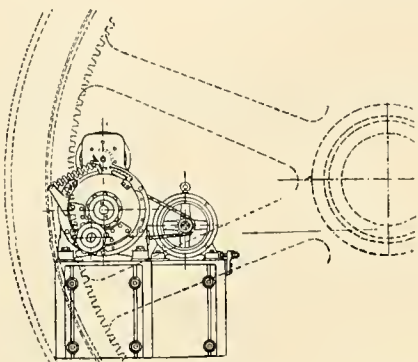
ELECTRIC STARTER FOR 3000 H. P. ENGINE WITH CHAIN MOTOR DRIVE.
